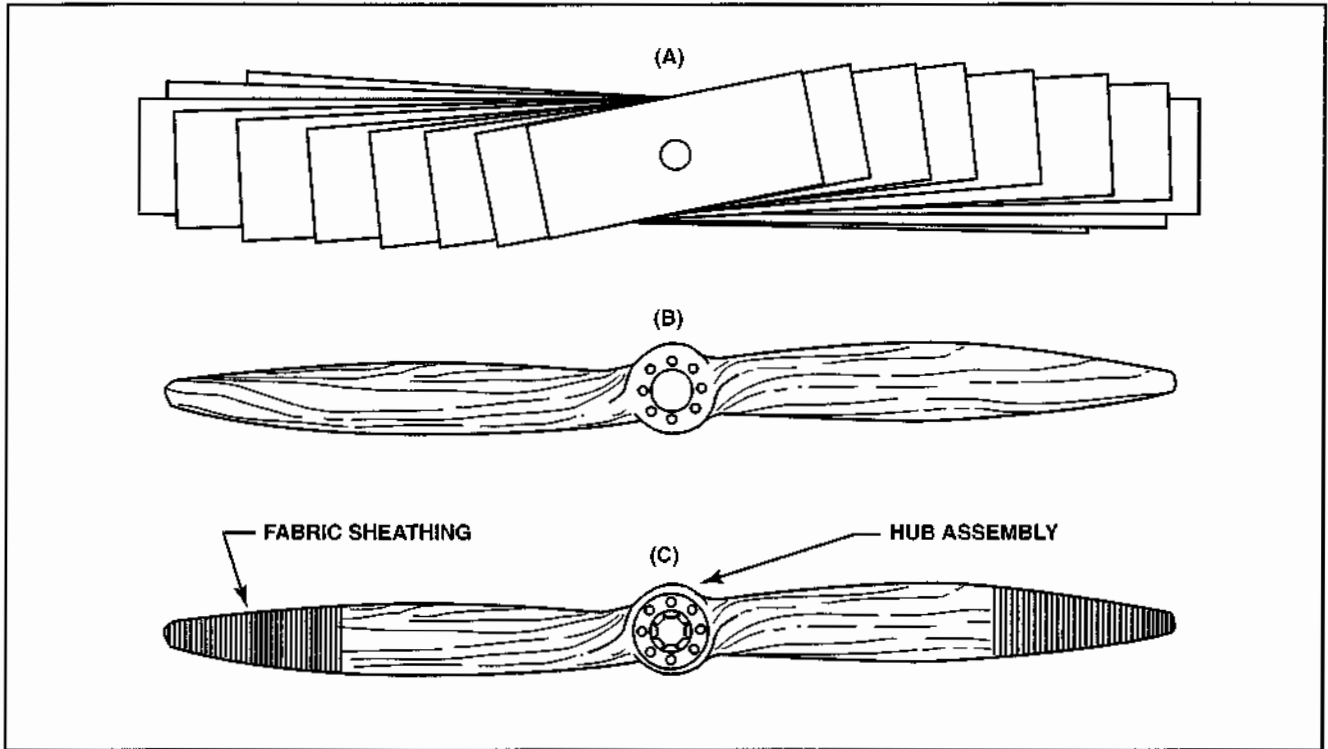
(A) The first step in the manufacture of a wood propeller is to laminate planks to form a propeller blank. (B) The propeller blank is shaped and its hub is drilled. (C) After the propeller is sanded smooth, a fabric sheathing and varnish coating are applied for reinforcement and protection.
